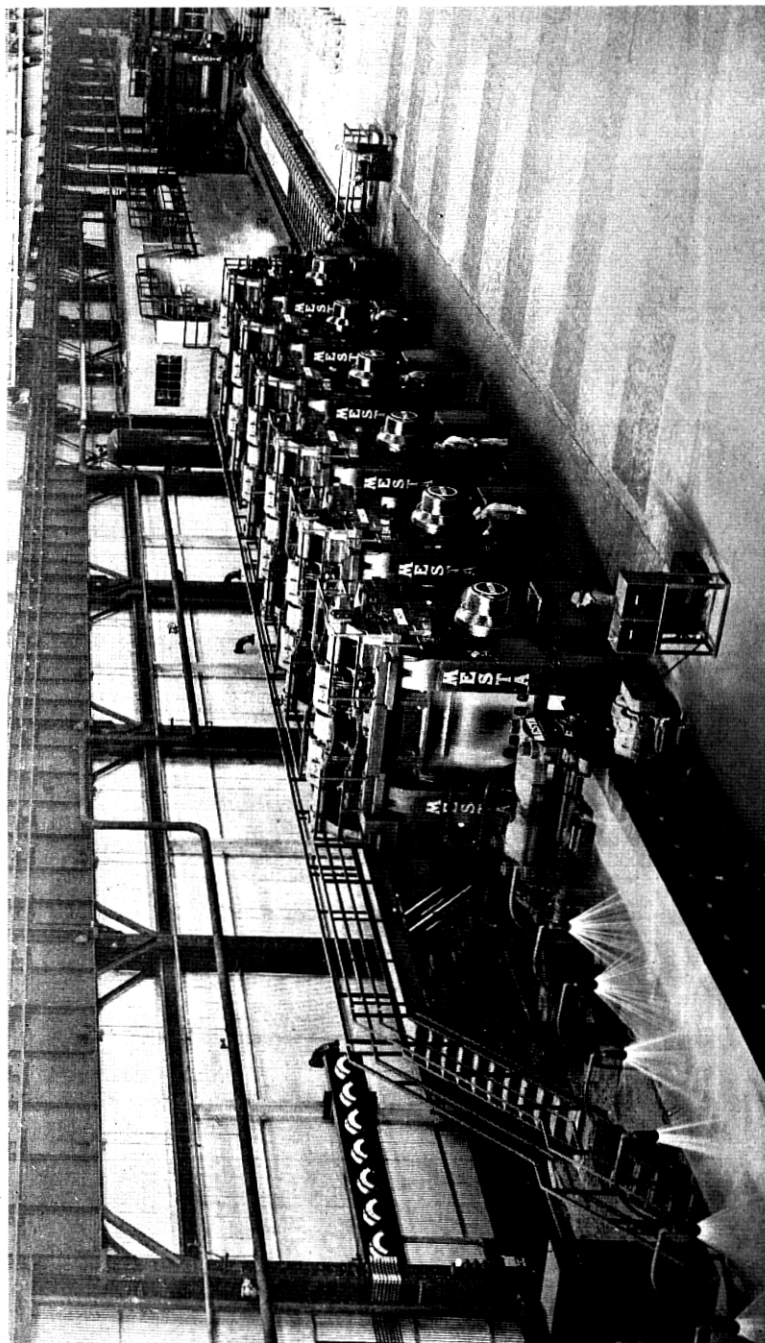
Continuous strip mill designed for large output, having 6 individual mills in tandem. Courtesy of C. W. Stoker of Carnegie Illinois Steel Corp.
